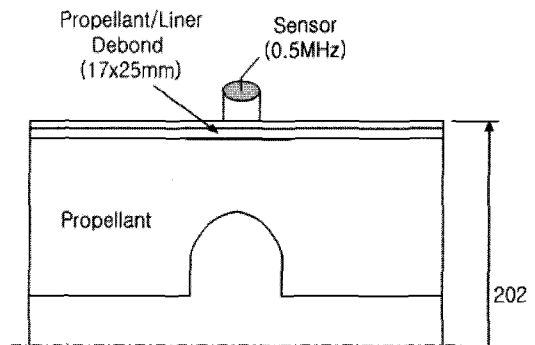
Test specimen for propellant/liner debond of rocket motor
